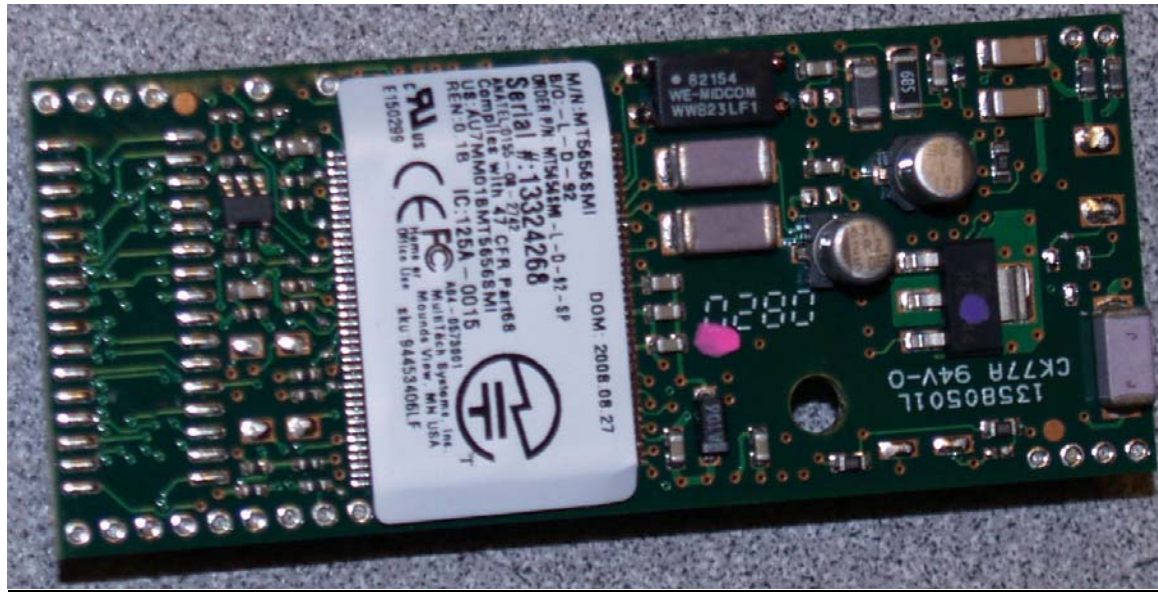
HomeBase (HB-100) – Modem PCB – top side
